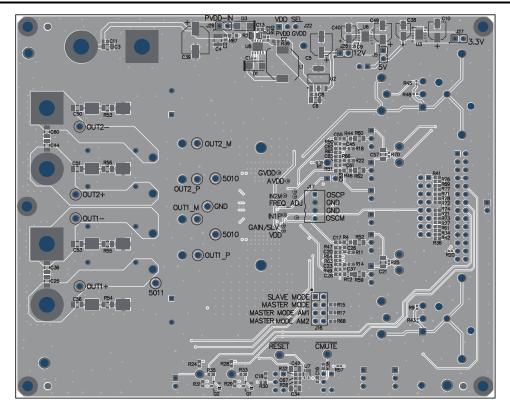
TPA3223EVM Bottom Composite Assembly
